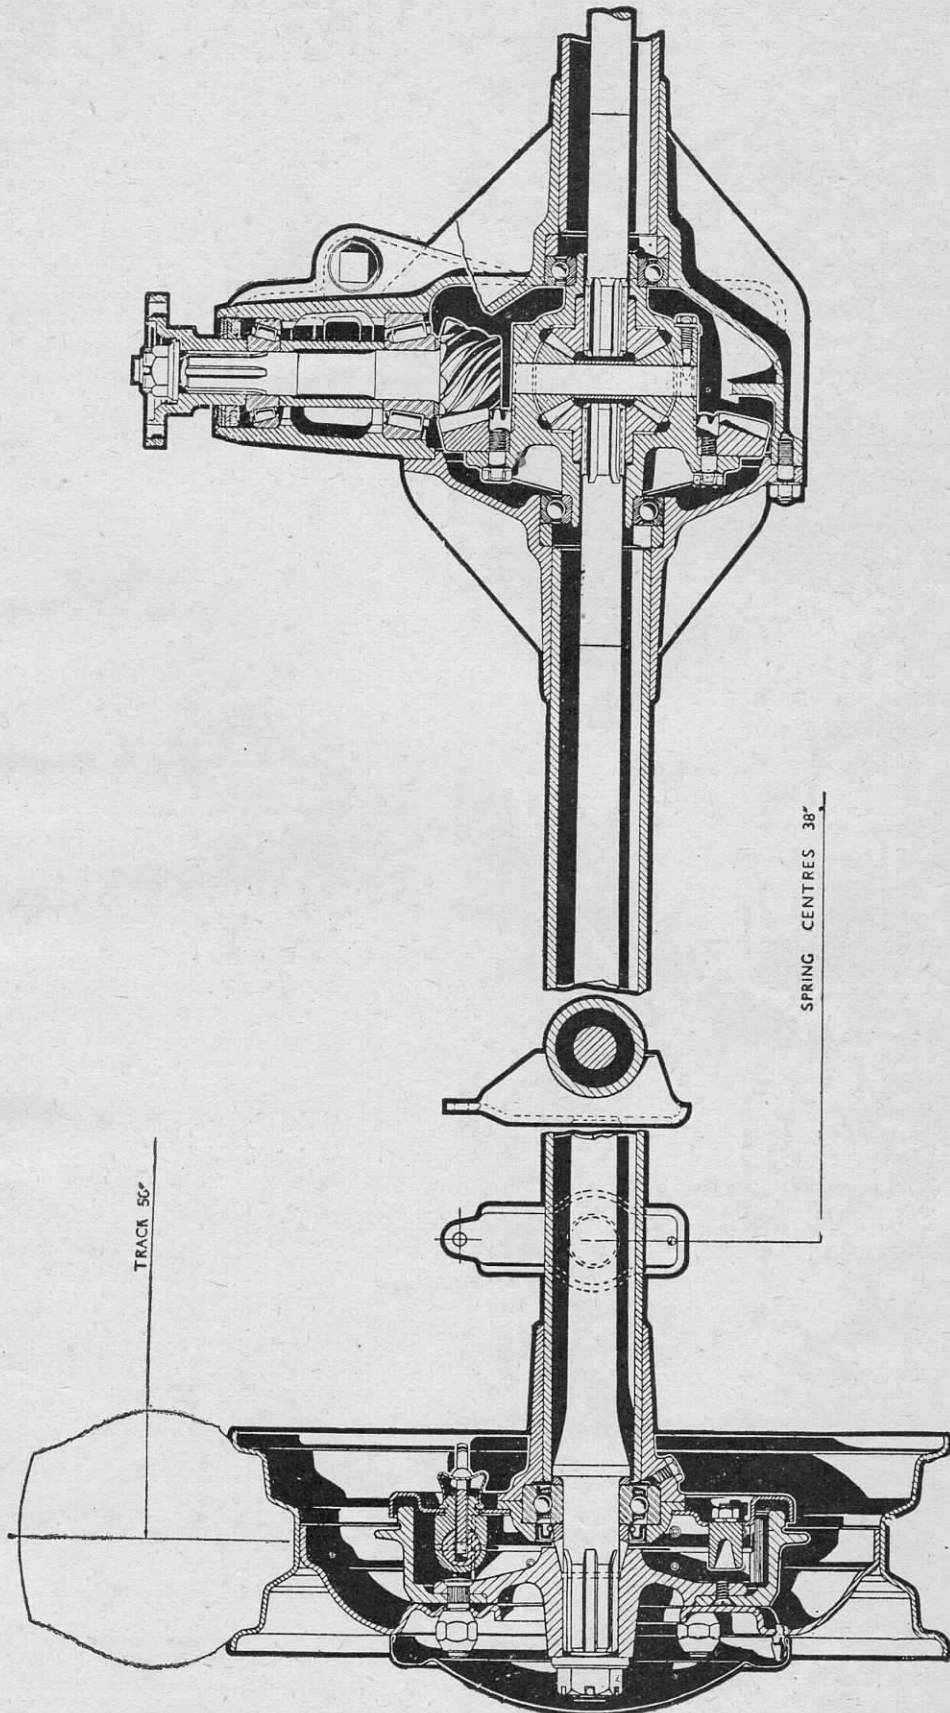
The M.G. Midget (Series 'TD') rear axle.
